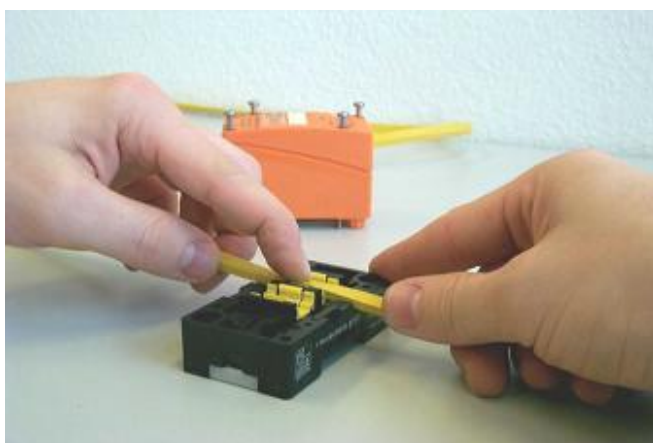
Pressing the AS-i flat cable into the yellow cradle
